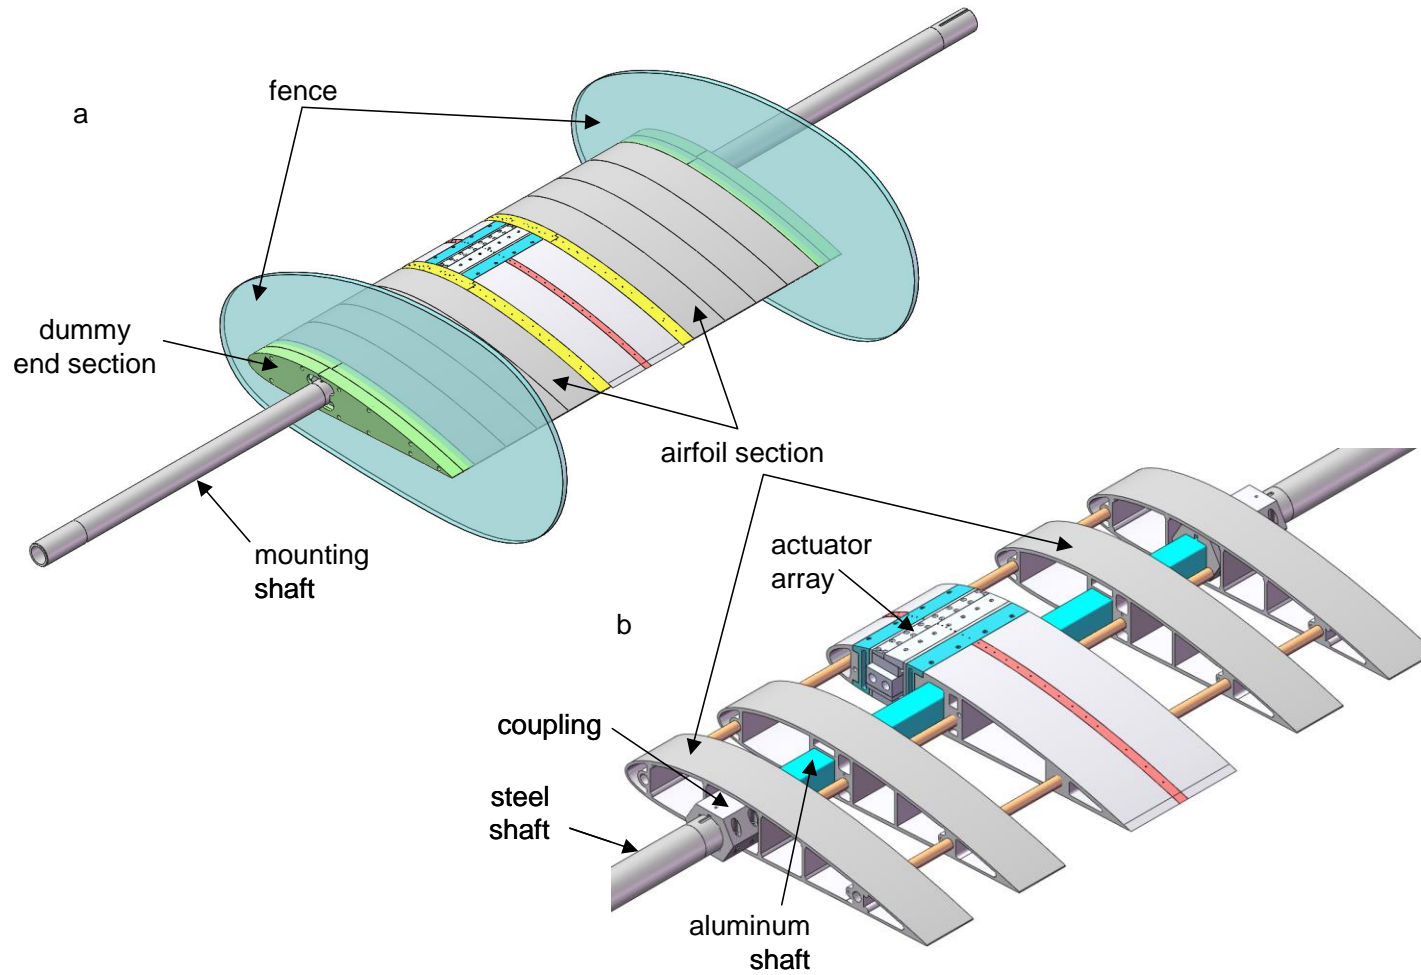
CAD model of airfoil model: a) Assembled with fences, mounting shaft and the dummy sections, and (b) Close up view of the actuator array and internal structure of the mounting shaft.
